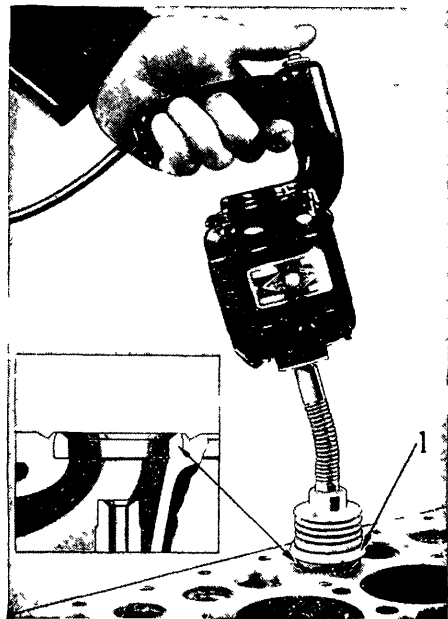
High speed grinder refacing exhaust valve seat inserts. 1935-52
